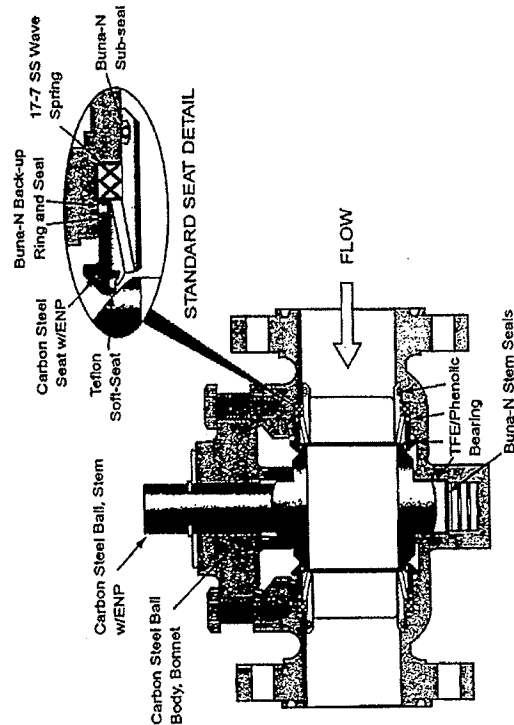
6-in. Ball Valve Used as Isolation Valve in Oxygen Pipeline.
